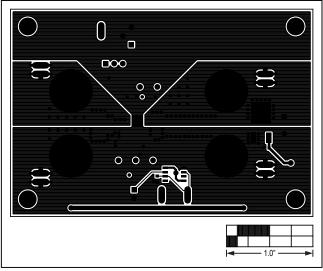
MAX15091 EV Kit PCB Layout—Solder Side
